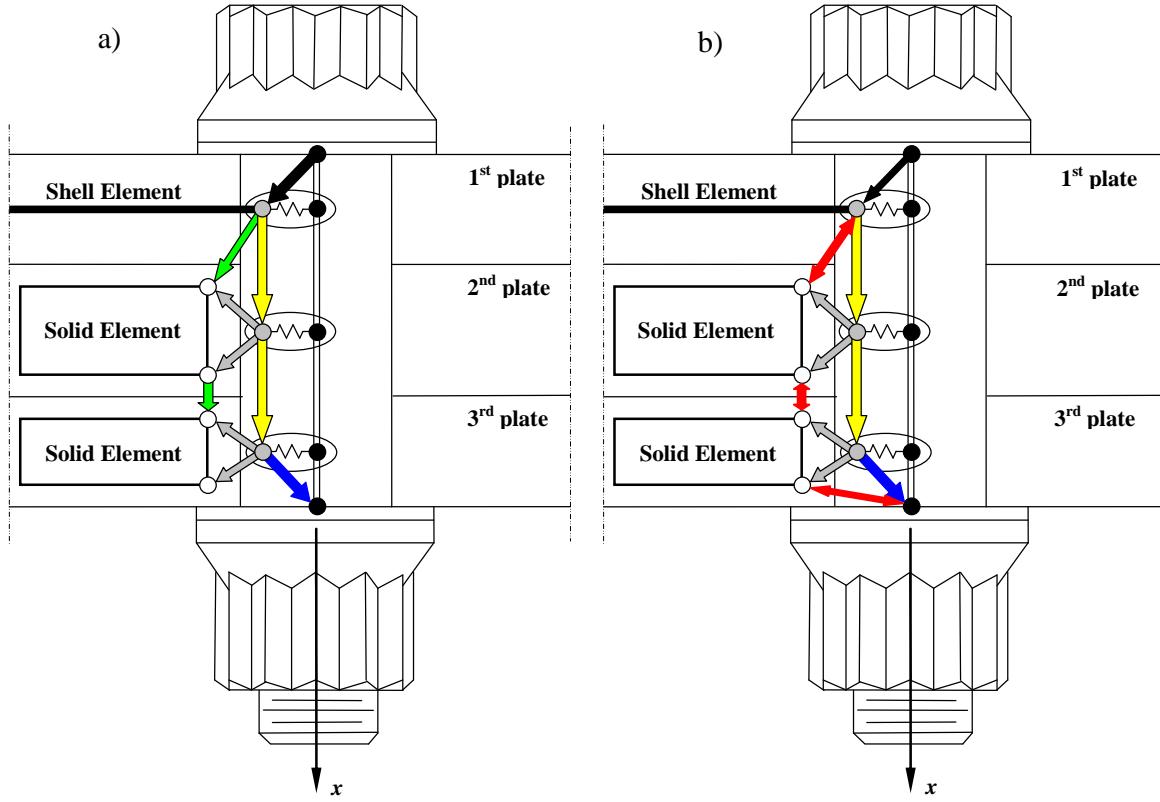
Model of a Fastener Joint Connecting Three Plates Modeled as Follows:
